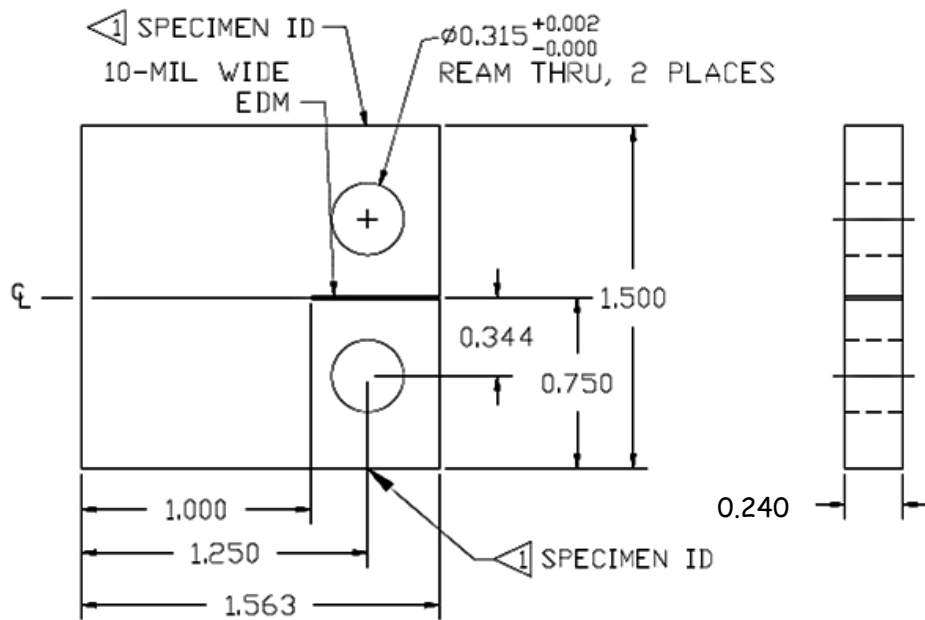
Plane Stress Fracture Toughness Specimen Drawing
